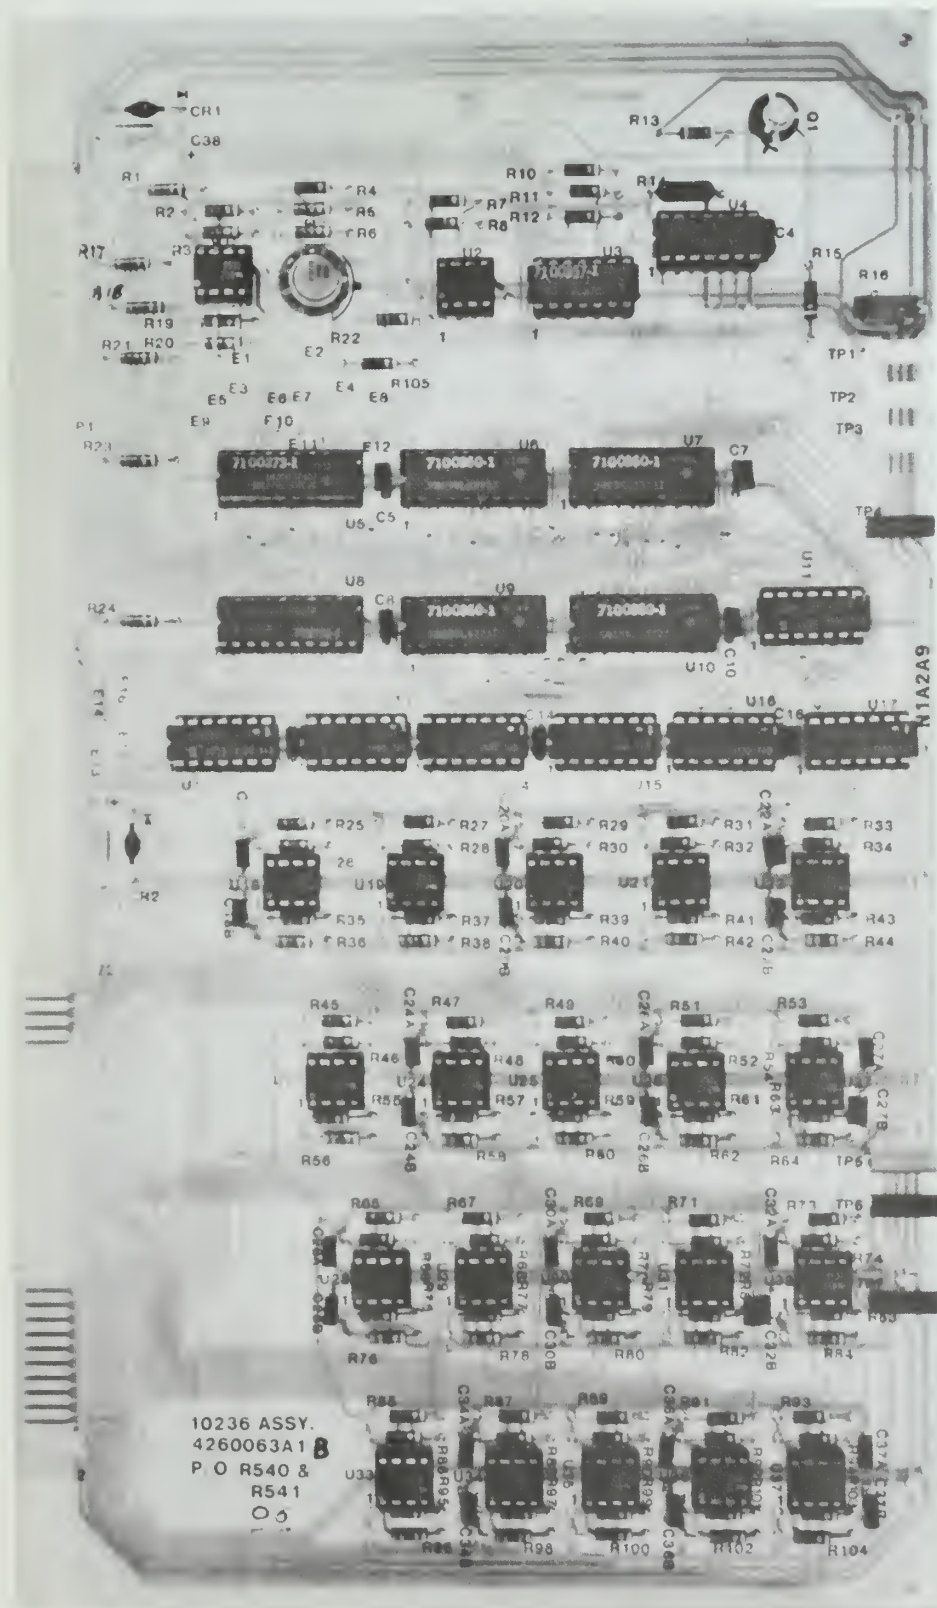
Input Buffer CCA N1A2A9 (4620063A1) — Component and Wiring Side
